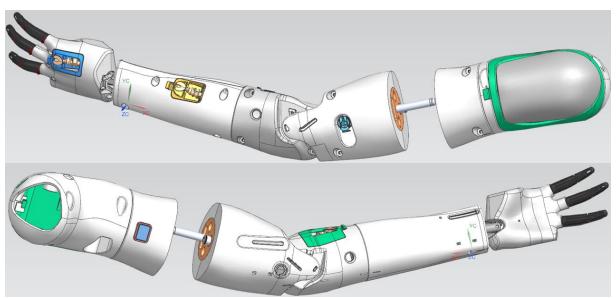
CAD Model of modular arm showing the front (top) and back (bottom) of the detachable arm module being removed from the shoulder module.
